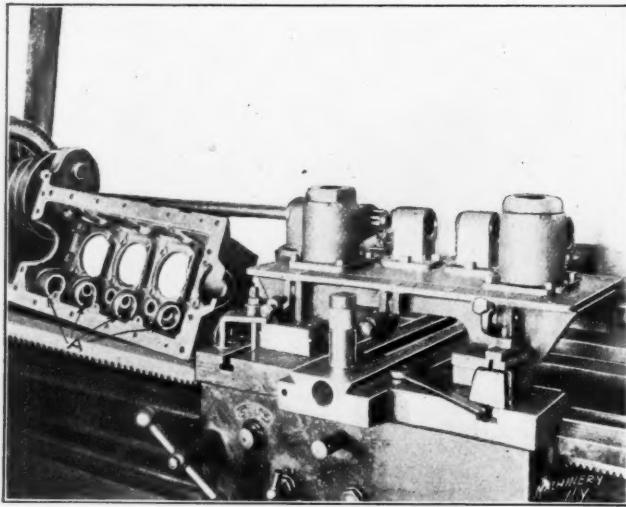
Fixture for Boring Cam-shaft Bearings in Engine Frame
